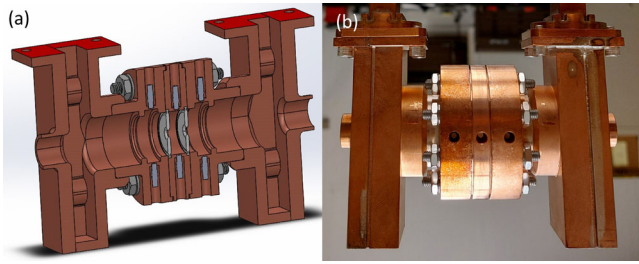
A cutaway view of the clamped DDA prototype showing the ceramic disks, tuning pins, and couplers (a). The structure after assembly (b).
